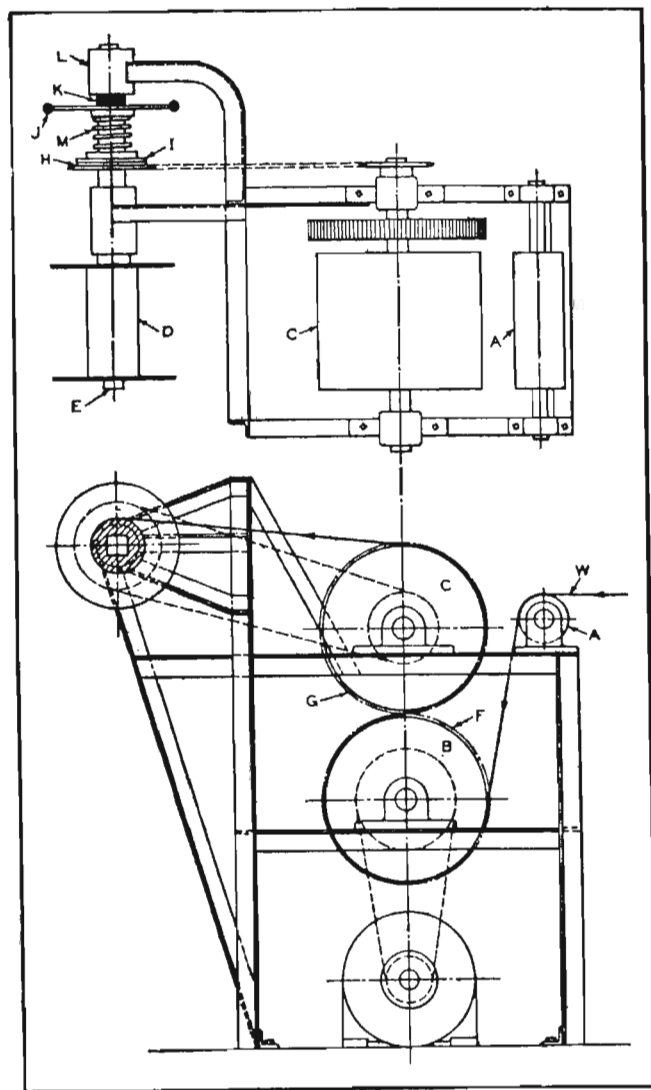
Constant-speed Rolls for Pulling Metal Strip through Processing Machine and Winding it on Metal Spool.
